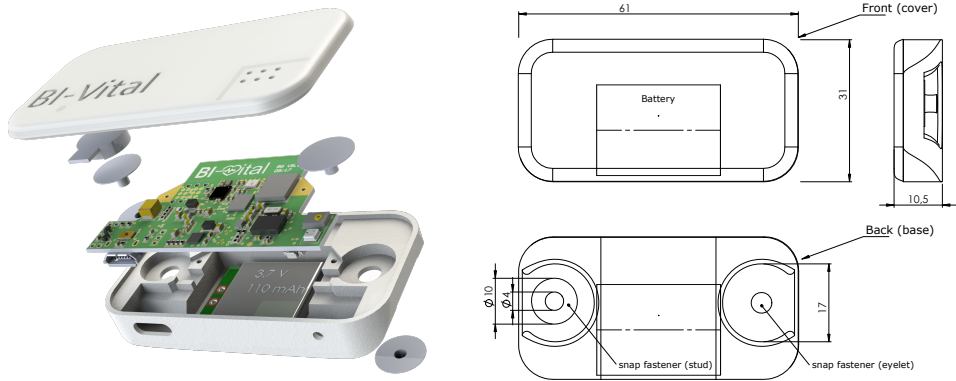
Explosion view render and assembly drawing of the BG-V5's enclosure, PCB, battery, and additional mechanical components (i.e. snap-fasteners and vibration motor).
